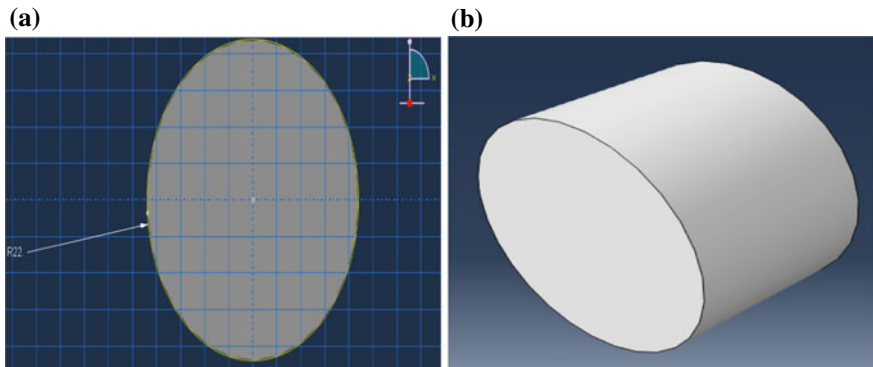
a Geometry for workpiece with R 22 mm and b shown 30-mm-extruded cylindrical workpiece
